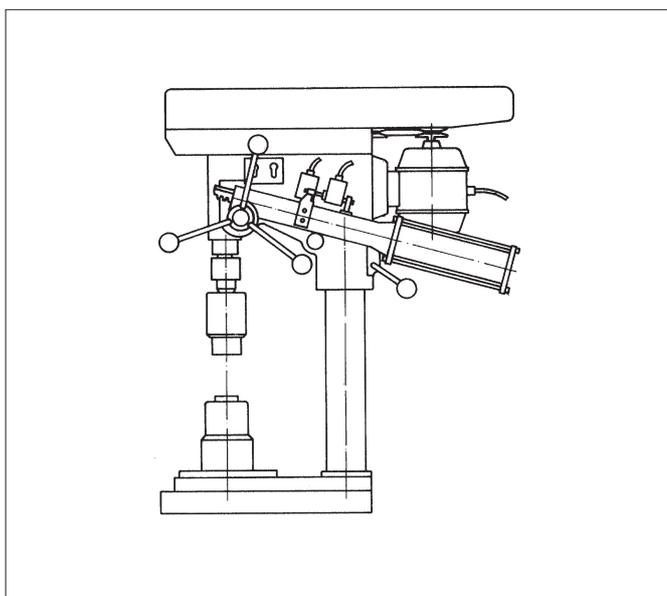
Inertia Welding, Rack and Pinion Conversion
